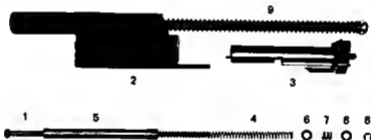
Bolt assembly, .22 Cal. (5.6 mm)
